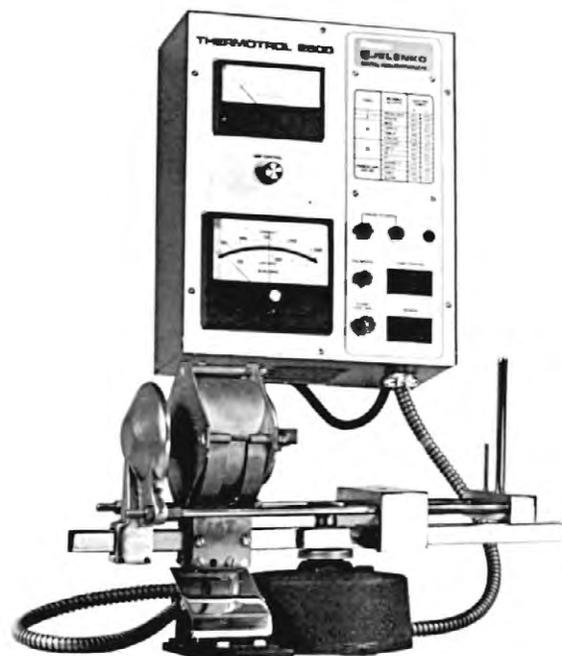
Spring-wound casting machine with electrical resistance melting furnace.
